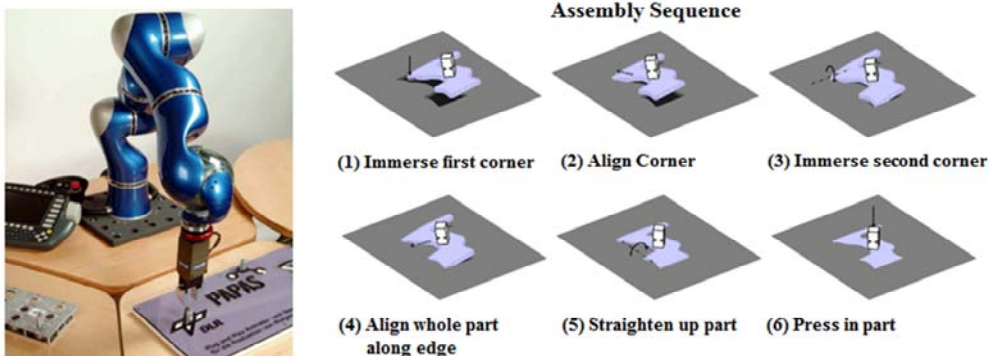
Complex shaped part assembly with force and vision information [30, 36]
